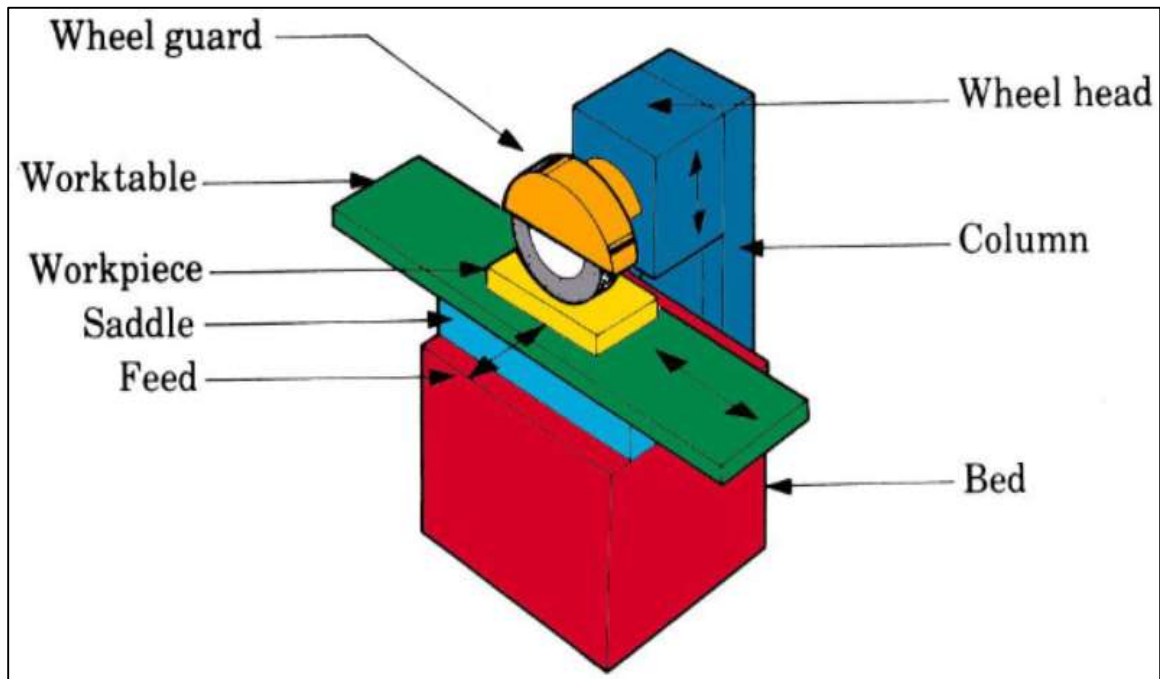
Schematic diagram of horizontal surface grinding machine [5]
